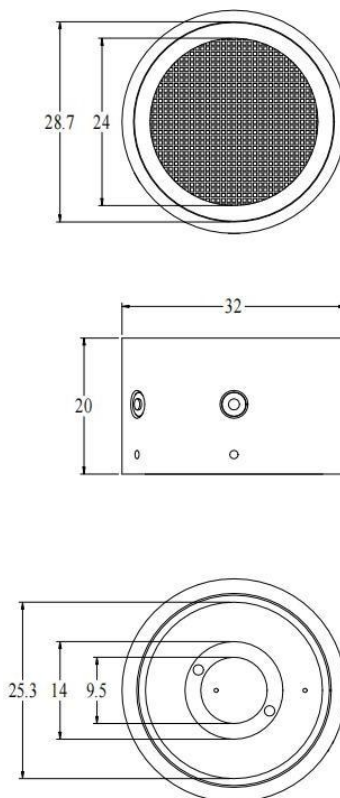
Outline Dimension Drawing of AOP10 PPM Oxygen Sensor
